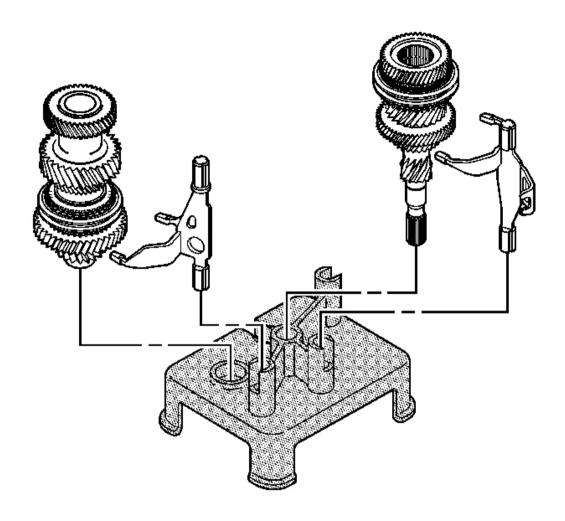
Shift Forks & Gear Assemblies Courtesy of GENERAL MOTORS CORP.
